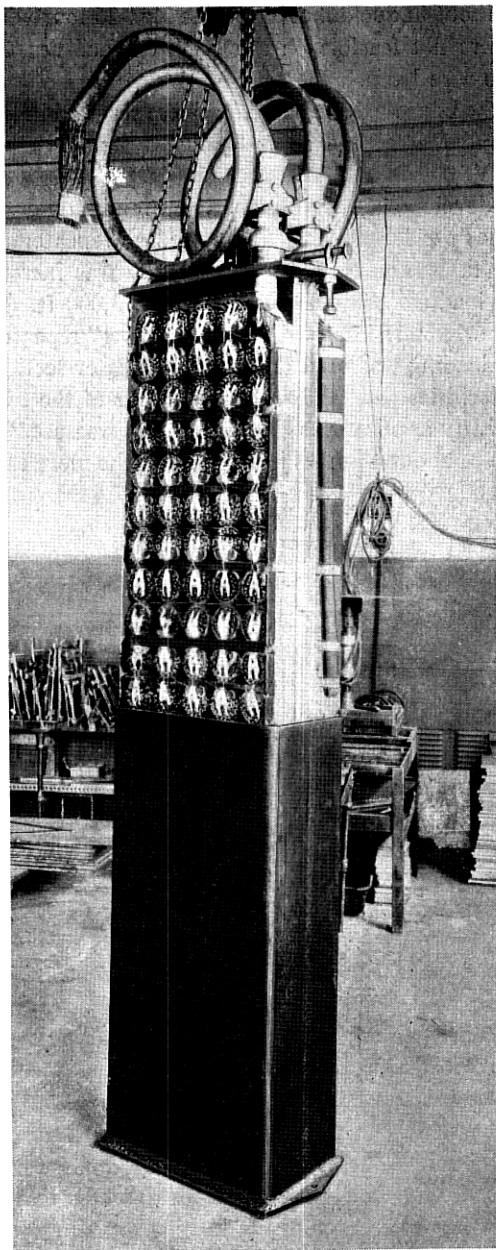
Potting assembly—108 P-B type loading units in large welded steel case. Assembly ready for lowering into casing. Half of loading units are on far side of assembly frame, not visible in picture. The large number of loading coils makes necessary the use of 2 stub cables.
